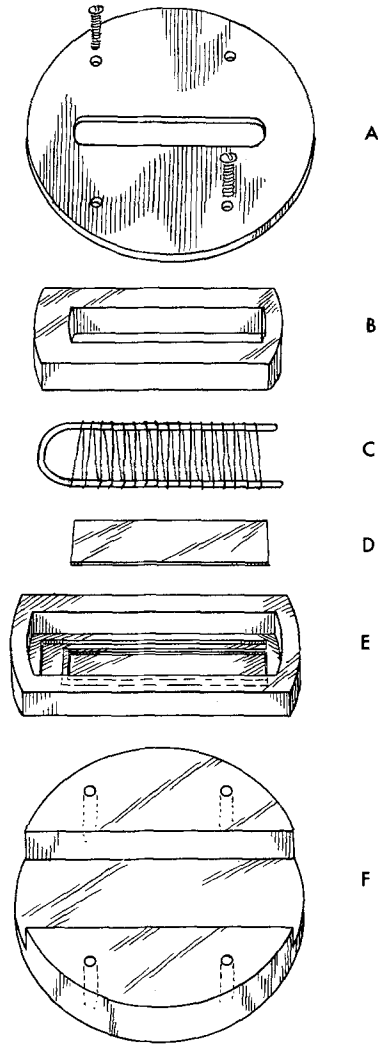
Exploded view of chamber assembly. (A) clamp top; (B) chamber insert; (C) support assembly; (D) cover glass insert; (E) chamber bottom; (F) clamp base
